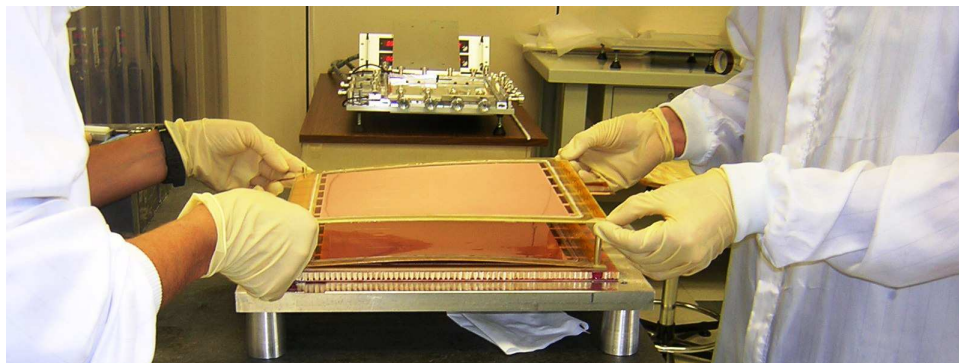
The framed GEMs are assembled on the cathode PCB.
